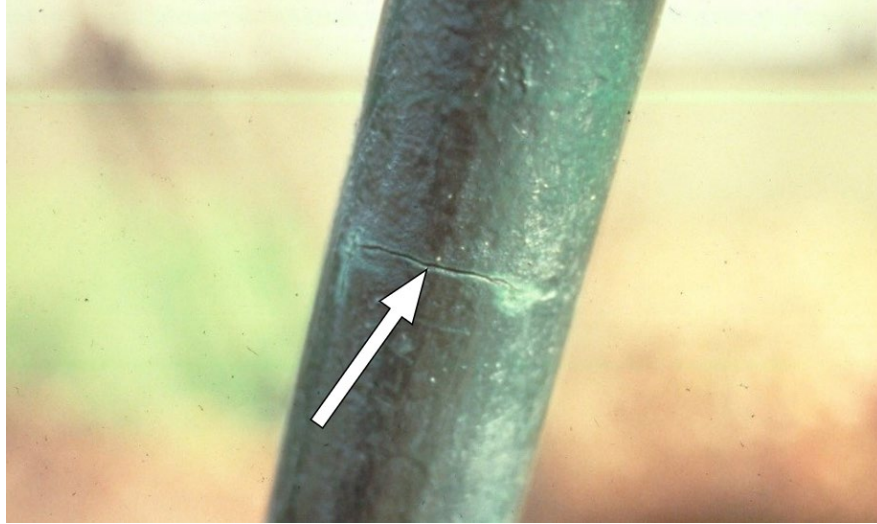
Cracking of Cable Sheathing
